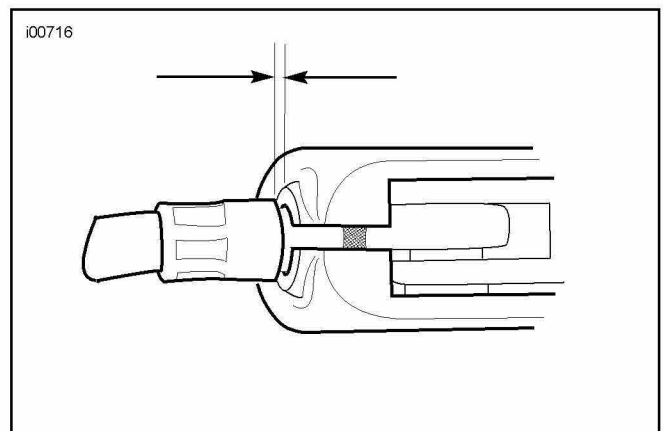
1/16-1/8 inch (1.6-3.2 mm) Clutch Cable Free Play
